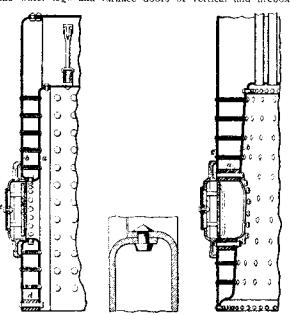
shows the door constructed by flanging the furnace sheet *a* and the front sheet *b* of the boiler. Single riveting is shown here, although the joint is frequently double-riveted. An enlarged view of this construction is shown in Fig. 11. The door *c*, Fig. 10, is generally
